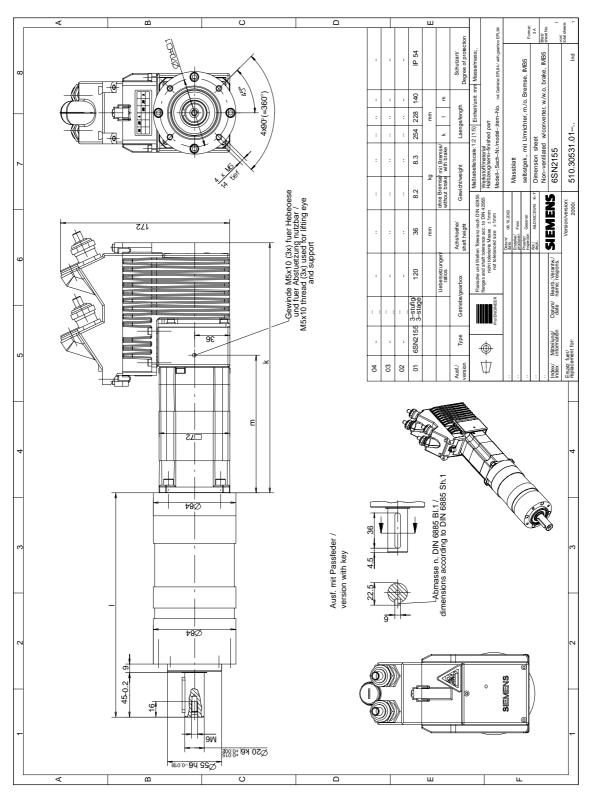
Dimension drawing: SIMODRIVE POSMO A – 300 W with planetary gearbox (3-stage)
